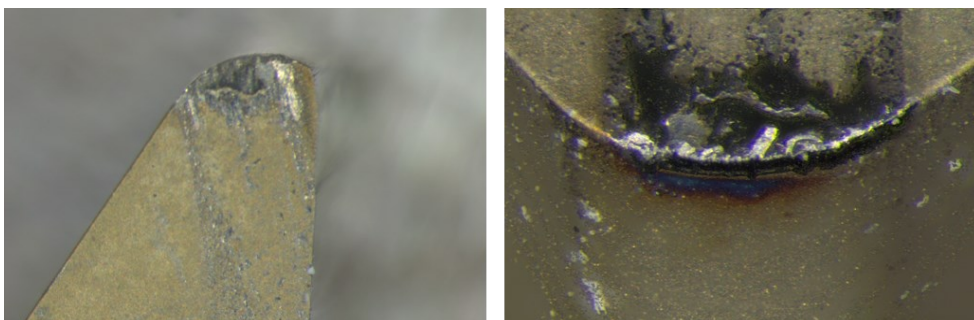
C4 coating machined at 60 m/min for 30 seconds in HP air, cut tools rake (left) and overview (right).
